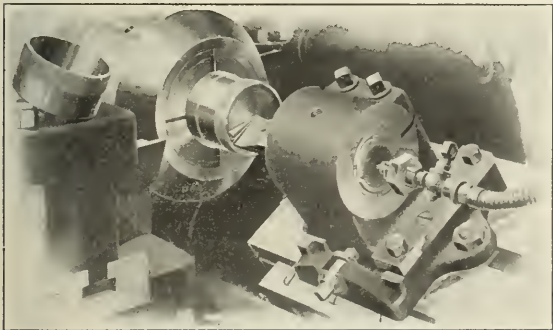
Set-over Tool-holder in Operation on 3-inch Hole
